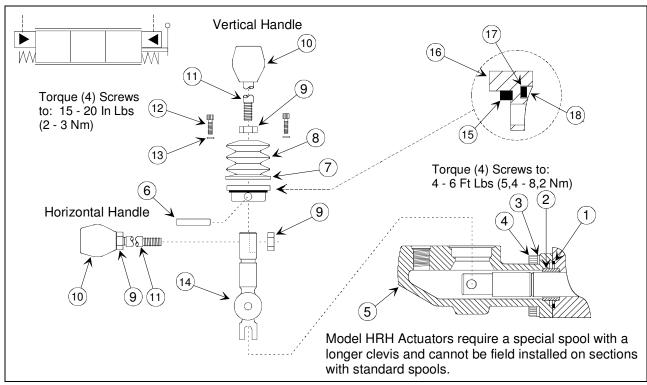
'HRH' Hydraulic Remote Spool Actuators
